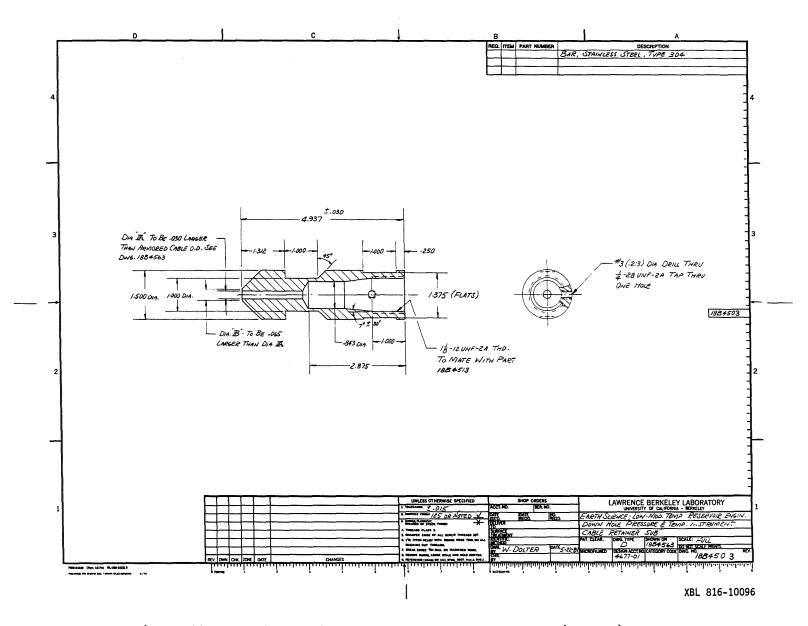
Detail drawing of the cable retainer sub (Item 1) of the geothermal cablehead.
